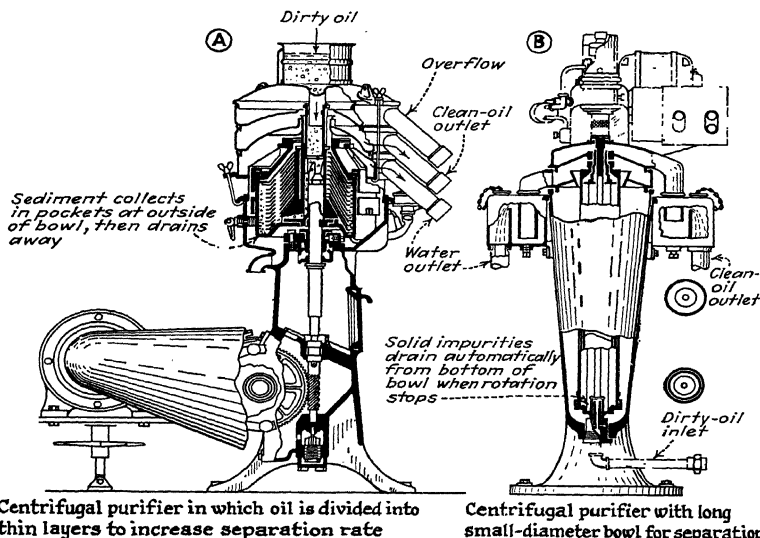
Construction details of centrifuges used for lubricating-oil purification. (Courtesy of Power.)
